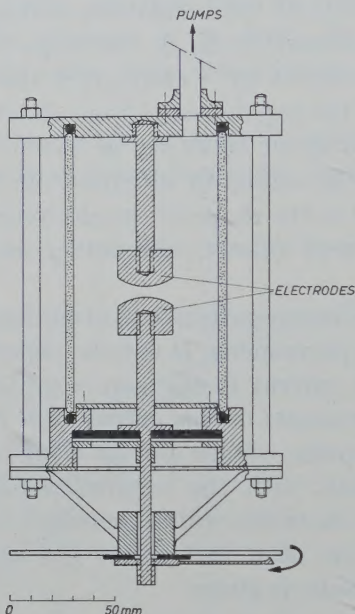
Cross-sectional view of the demountable vacuum chamber.
